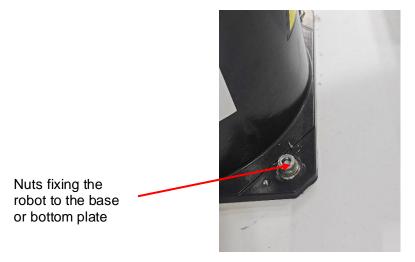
Nuts Fixing Robot to Base or Bottom Plate
